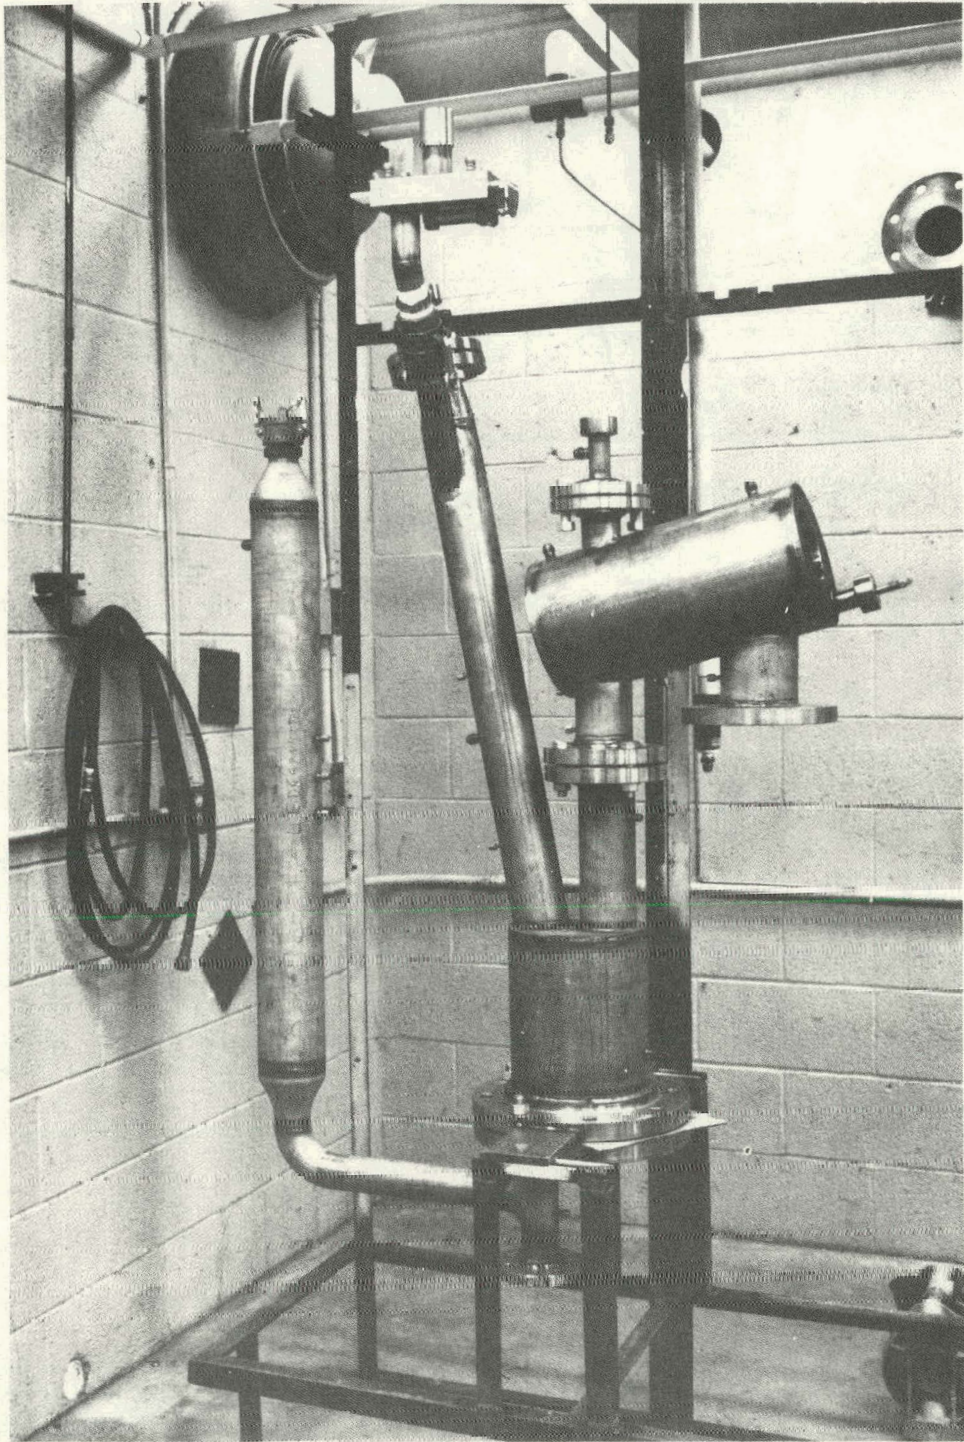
Mod 1 Reactor Weldment Assembly
